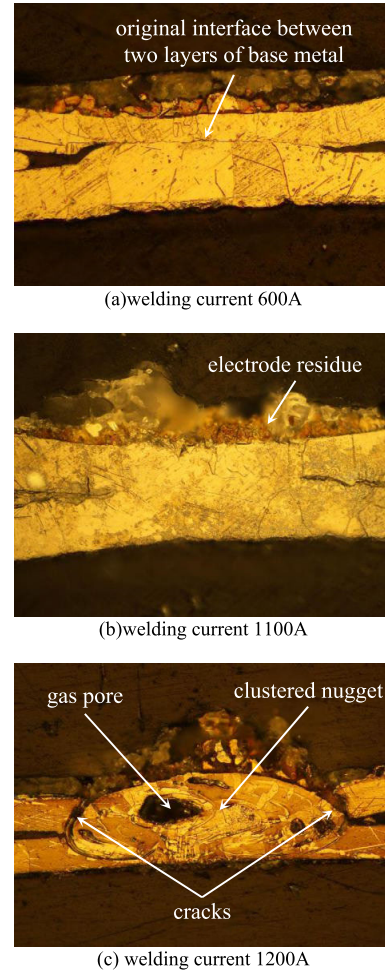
The metallurgical micro-morphology of weld nugget.
